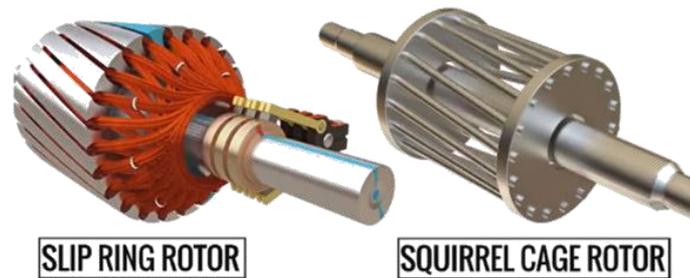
Squirrel cage rotor and slip ring rotor
